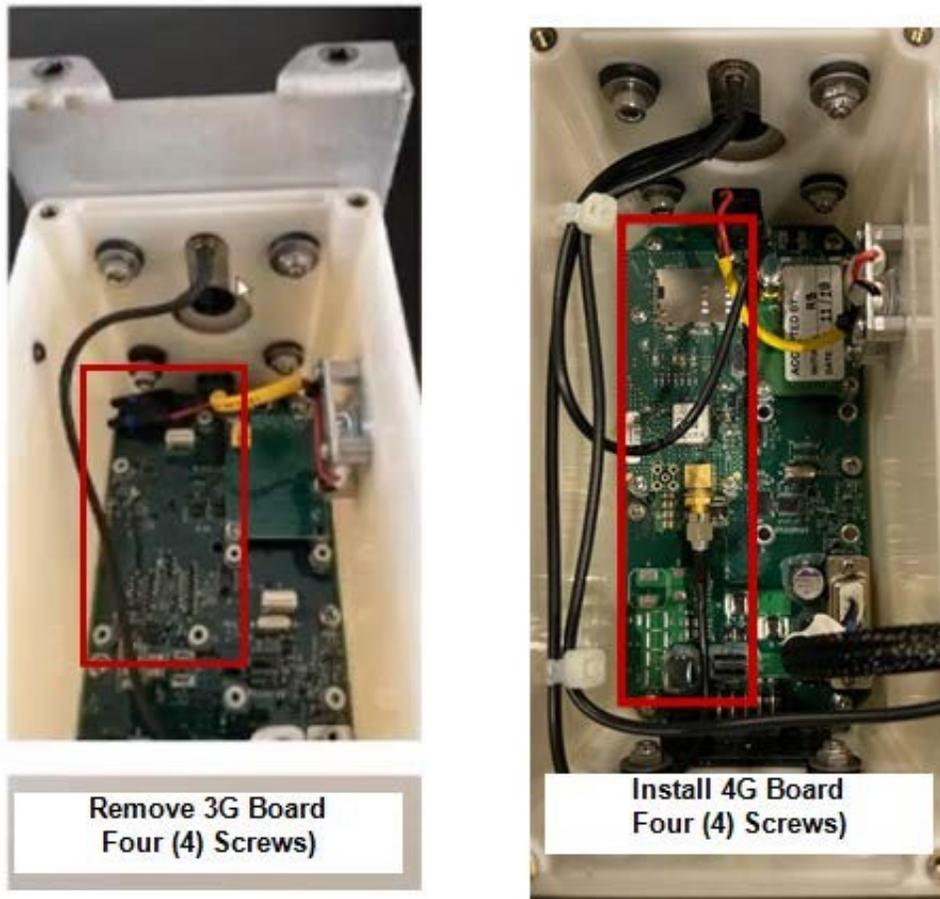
Remove entire PCBA to replace the 3G Board with the 4G Board
